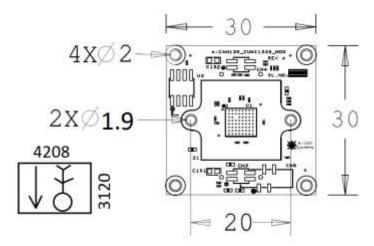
Front Portion of See3CAM_CU135 Module Board mechanical dimensions – the image will be upside down when the board is placed as shown above
